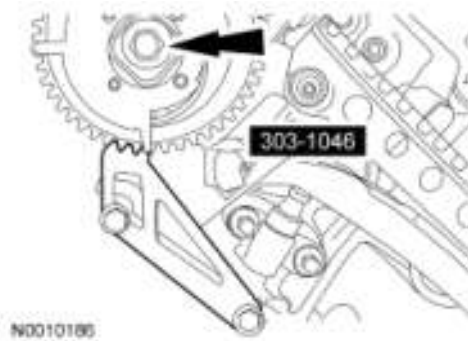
Identifying VCT Phaser Sprocket Bolt And Holder Tool
